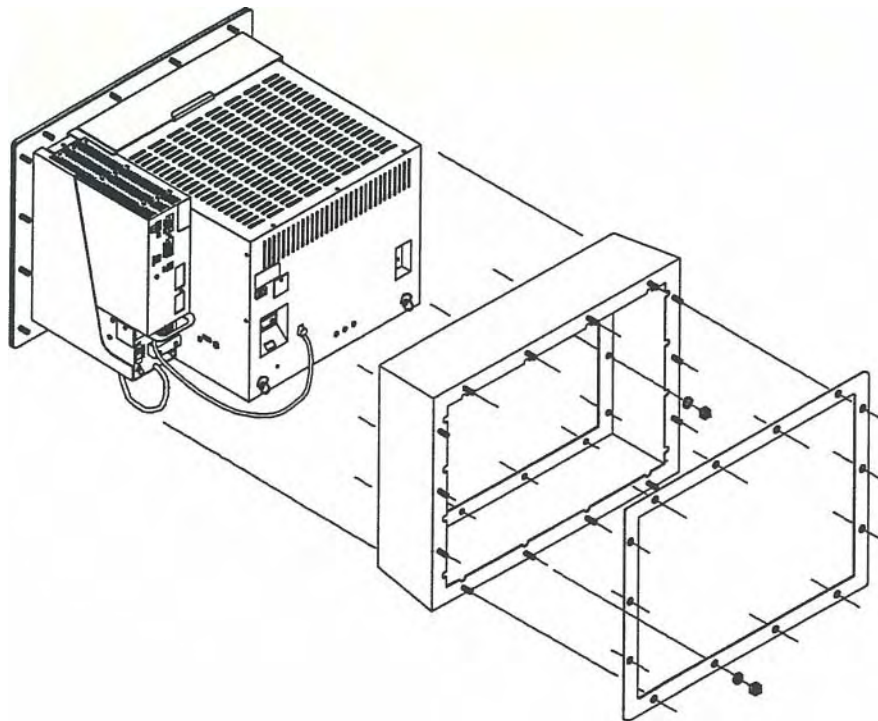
PanelMate Series 4000 (Model 4200) Mounting Collar Assembly
